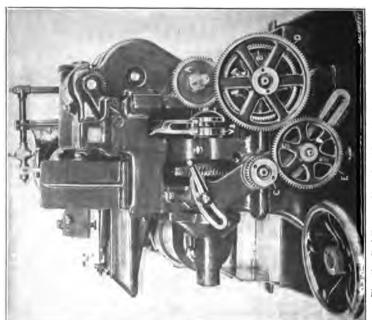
End View of No. O Machine showing Arrangement of Change Gears
